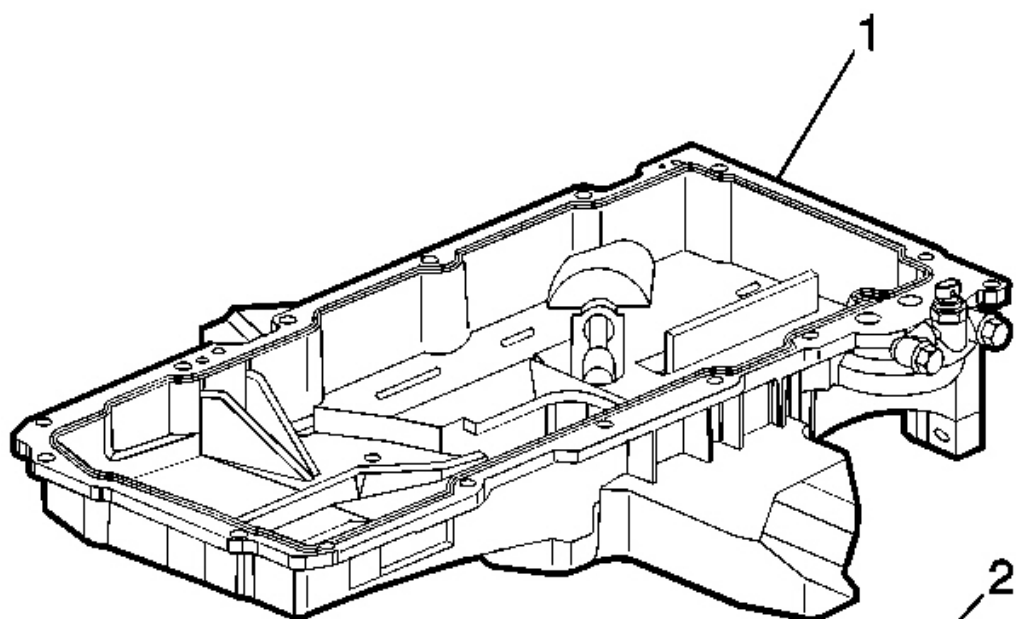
Lower Oil Pan, Gasket, Oil Pan & Bolts
